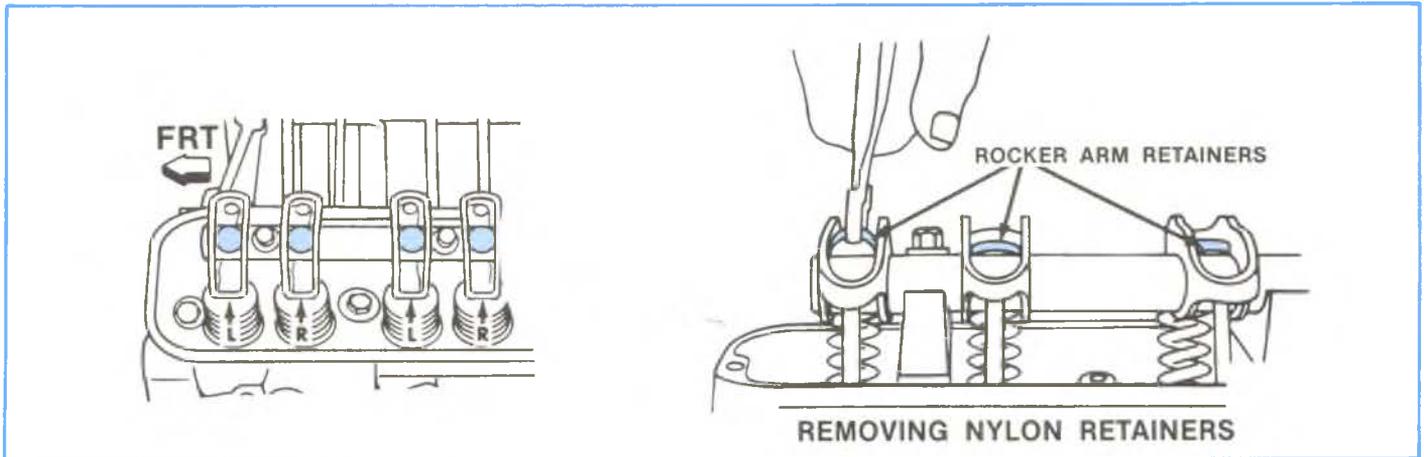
, 1985 and Later Rocker Arm Assembly.
